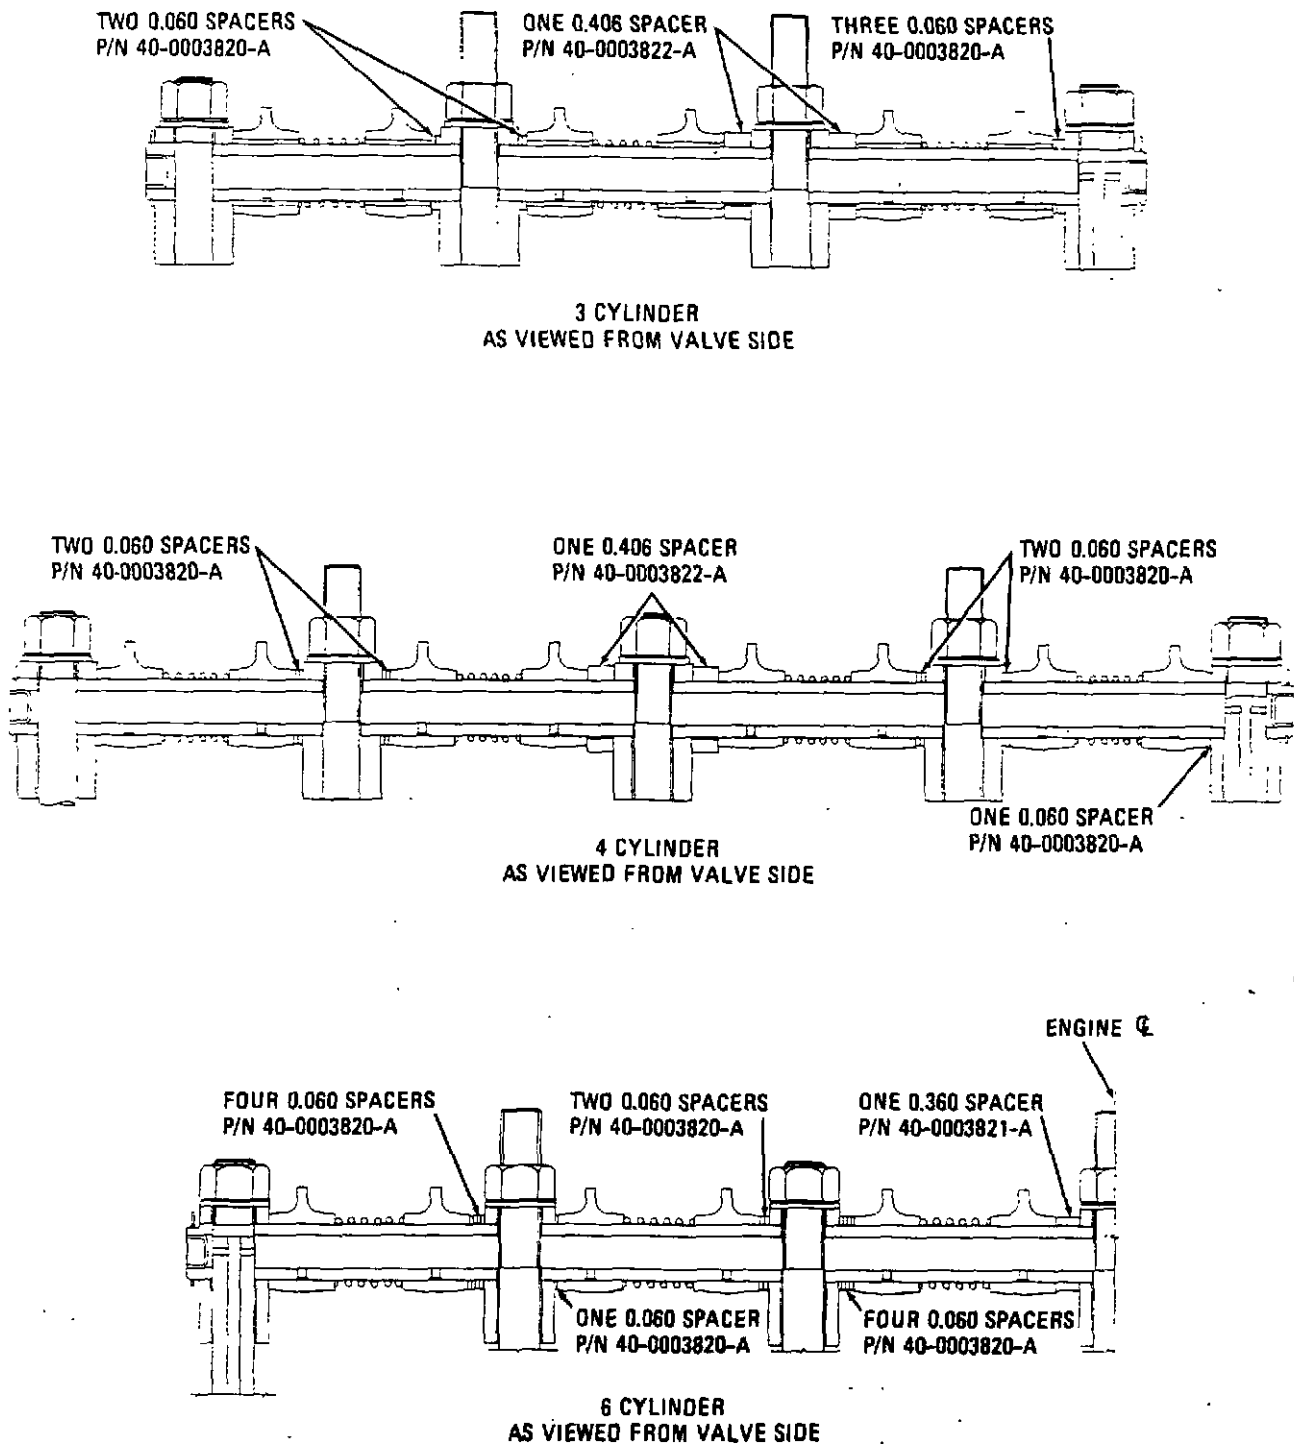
Rocker Arm Shaft Showing Spacer Position for Engines Having Identically Sized Shaft Supports
